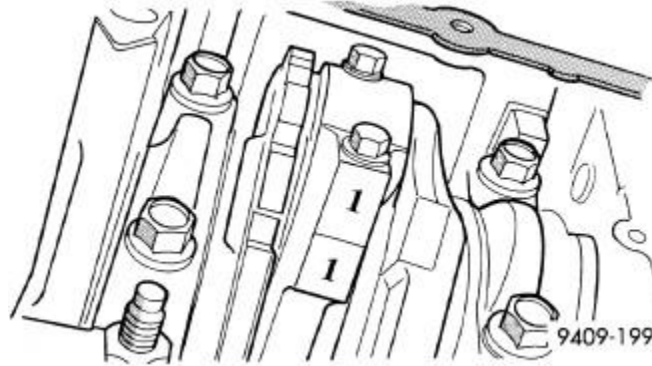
Identifying Mark On Connecting Rod And Bearing Cap
